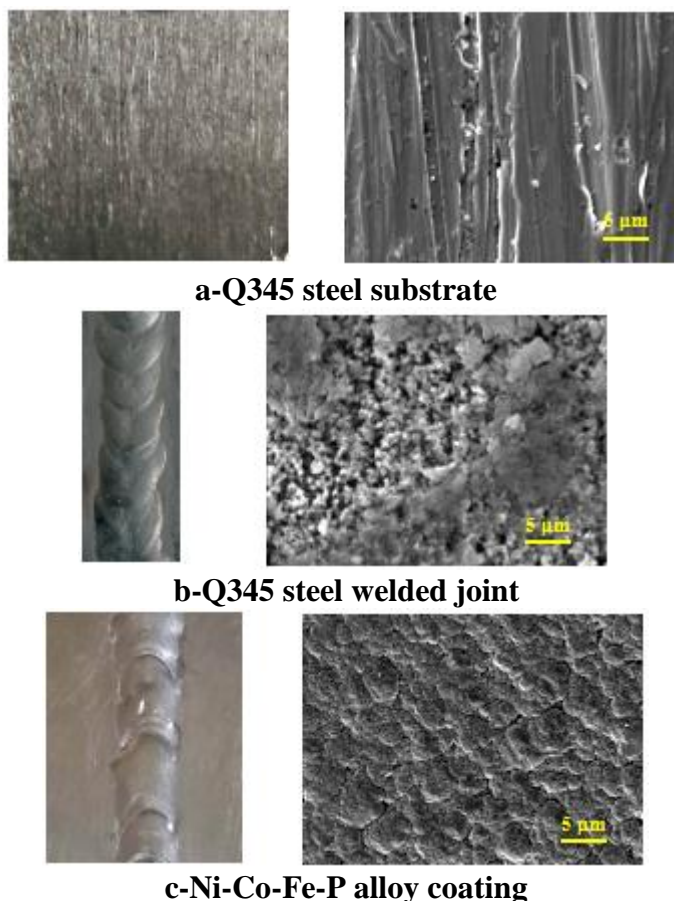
Appearance and surface morphology of Q345 steel substrate, Q345 steel welded joint and Ni-Co-Fe-P alloy coating
